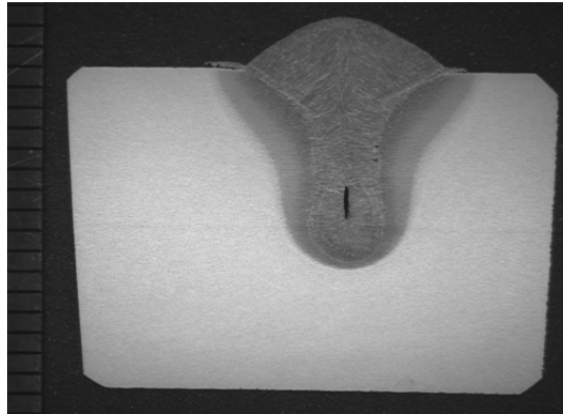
Solidification crack along the centreline near the root of a bead-on-plate laser-arc hybrid weld (scale bar is in millimetres) [1.1]
